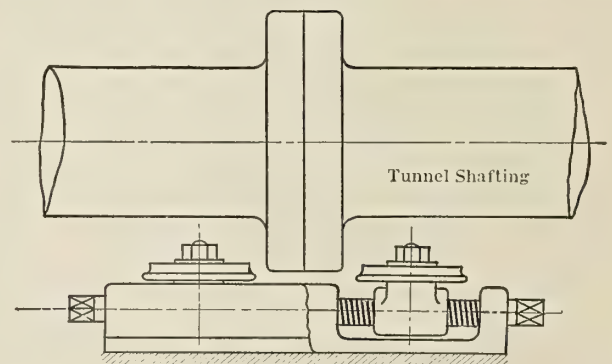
Sketch of Screw Roller Gear for Adjustment of Rotors
